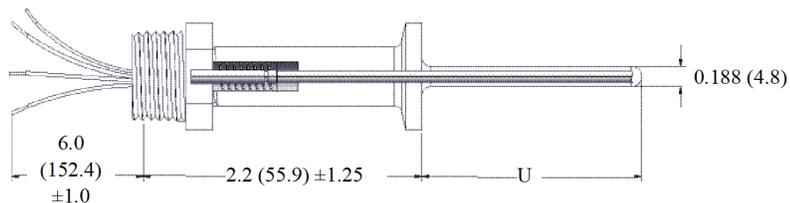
Rosemount 68Q Mini General Purpose Sensor with 1/2-in. NPT Threaded Adapter
